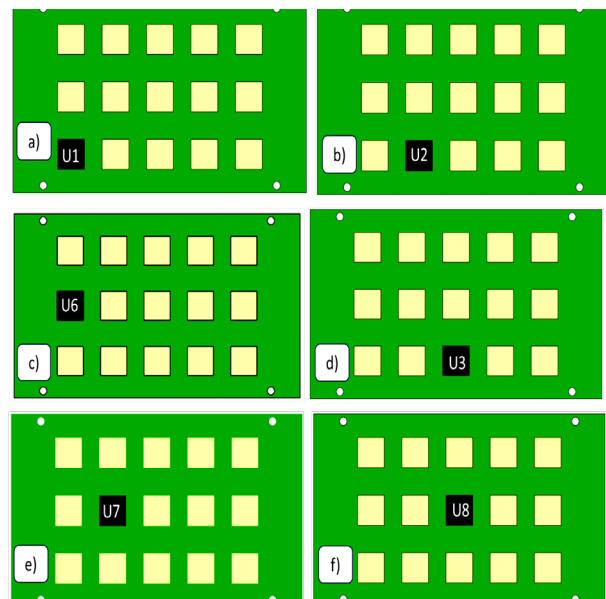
PCB assemblies with package at a)U1 b)U2 c)U6 d)U3 e)U7 and f)U8 positions.
